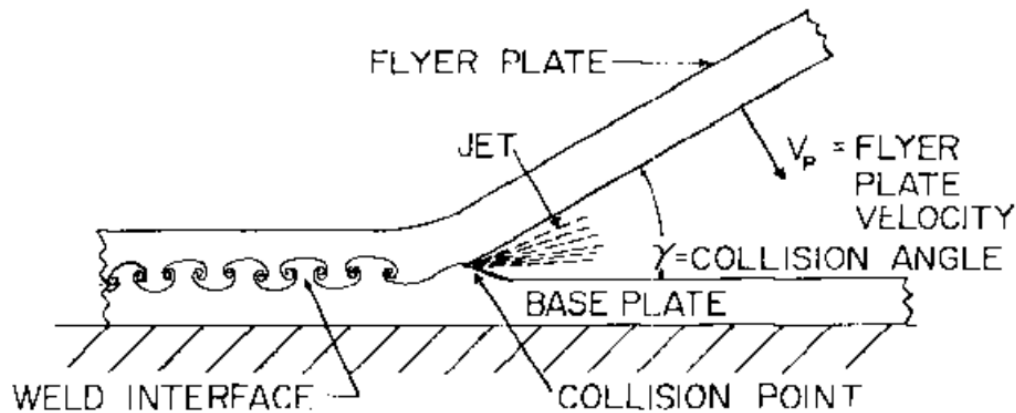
Schematic of an oblique collision like that in an explosion welding operation. [40]
